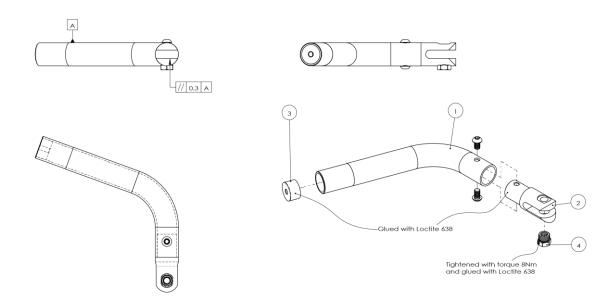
Exploded Drawing for Left Adjustment Arm Mechanism
